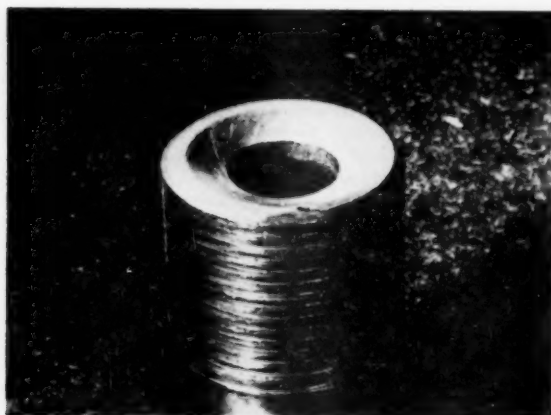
HOT-SHORT CRACK IN MT-1040 STEEL TUBE
